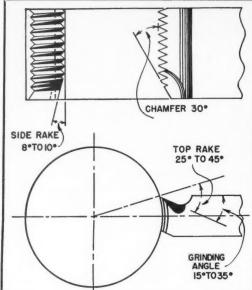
Illustration Showing Angles for Thread Chasers for Self-Opening Die Heads and Collapsible Taps
